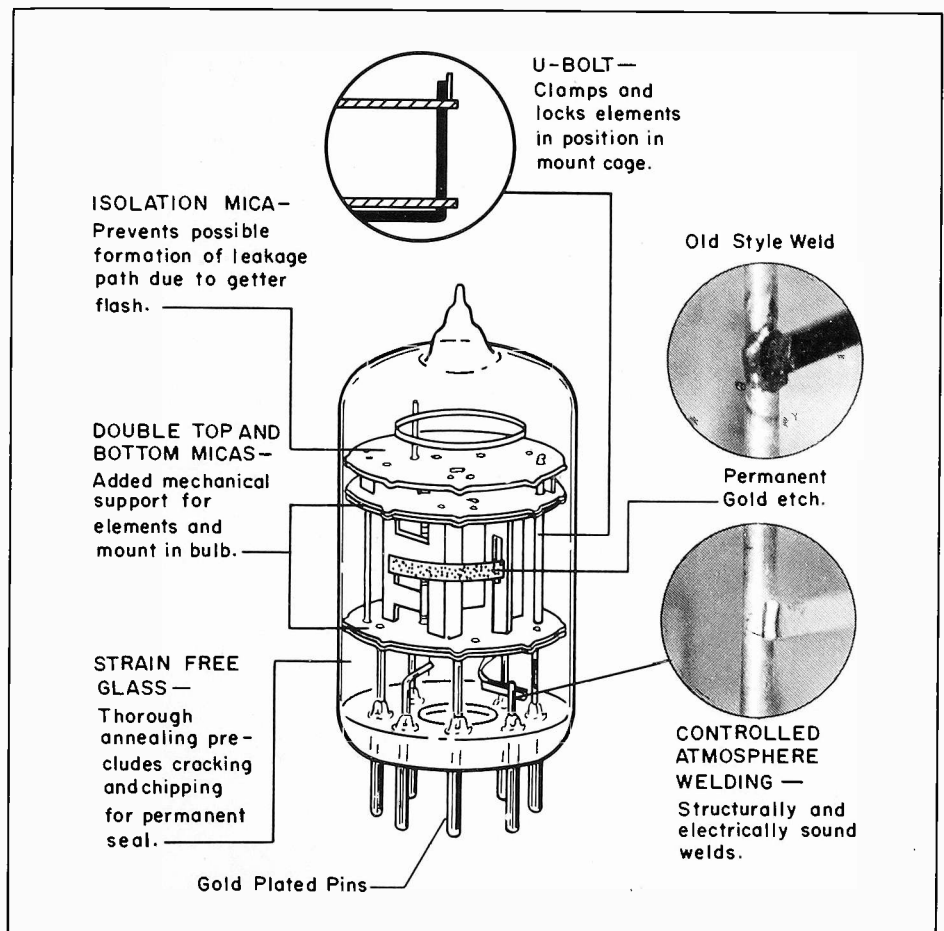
Construction Extras to Build in Mechanical Ruggedness.
